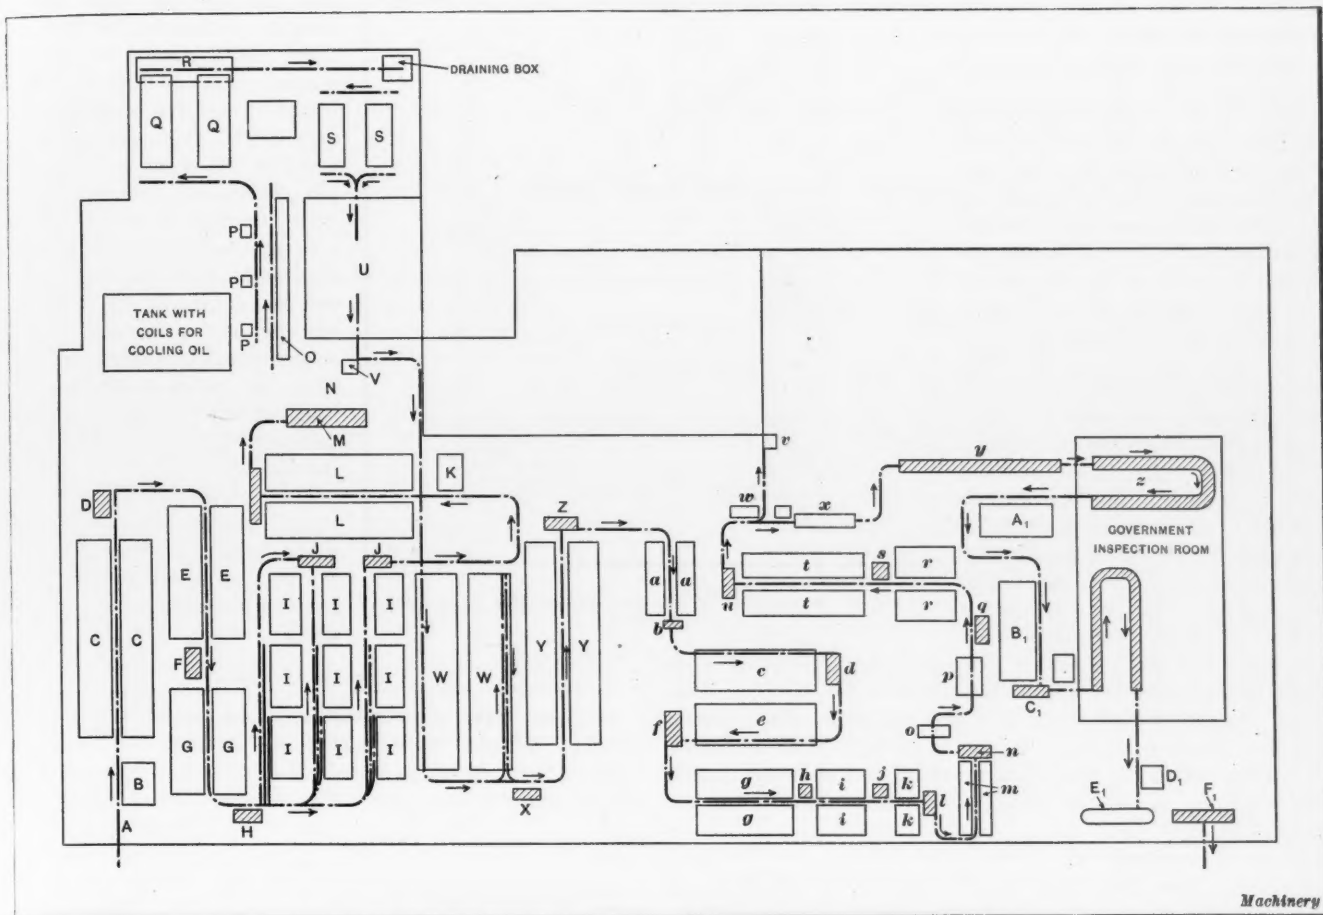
Plan of Plant showing how Shells pass continuously through Works
